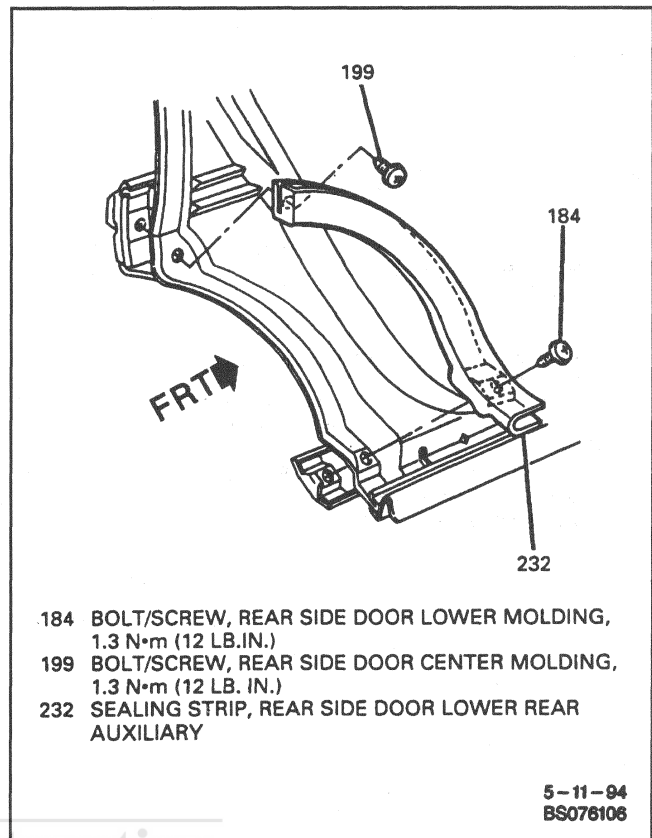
Rear Side Door Lower Rear Auxiliary Sealing Strip-(Buick Sedan)
